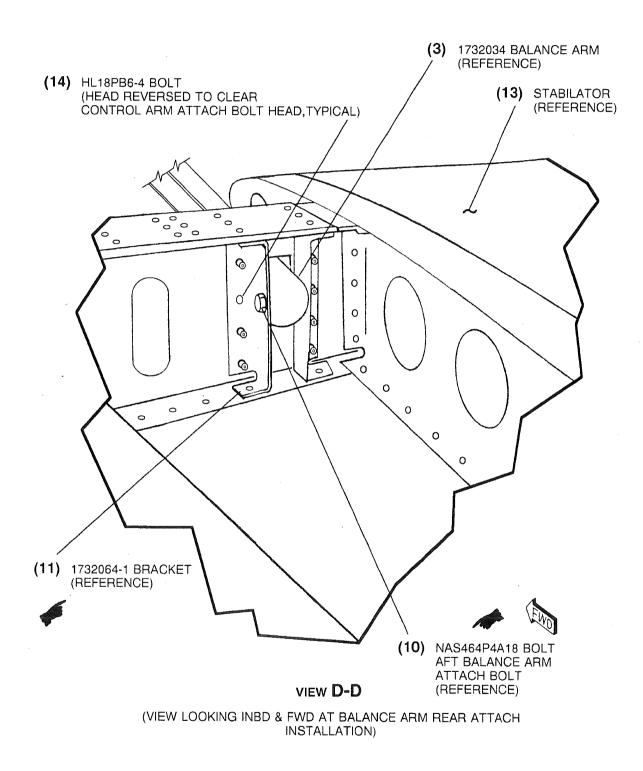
Stabilator Balance Weight Arm Brackets Inspection & Replacement (Sheet 4)
